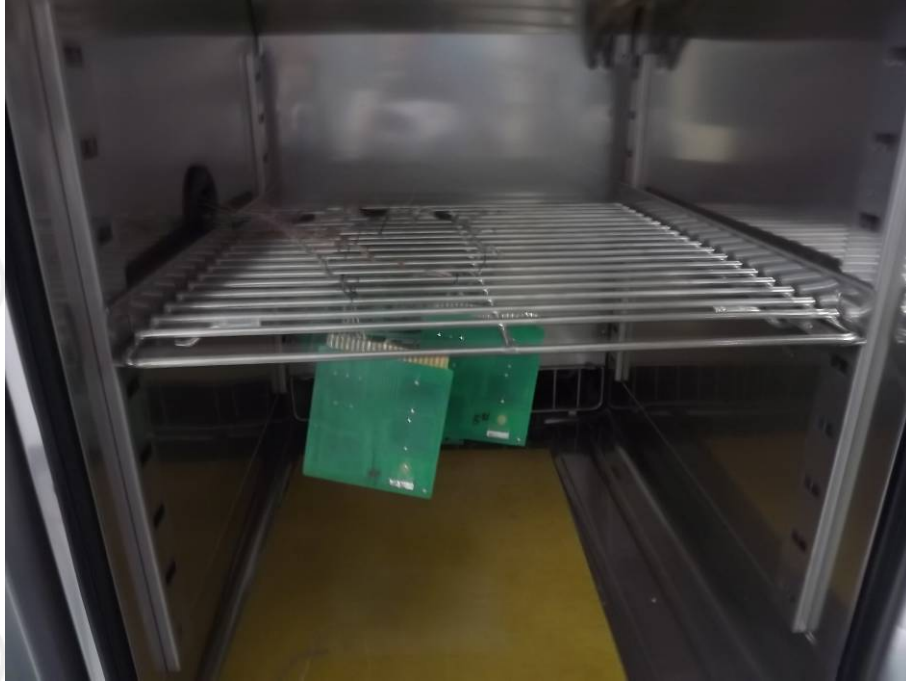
Sample PA120510012-2 reference board (Uncoated board) photo after test
